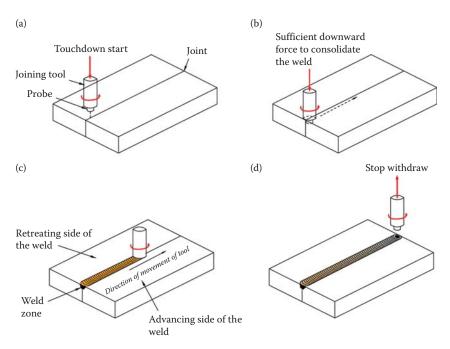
Schematic showing FSW: (a) commence welding; (b) force down to consolidate; (c) weld is advancing; and (d) completion of weld and withdrawal of tool
